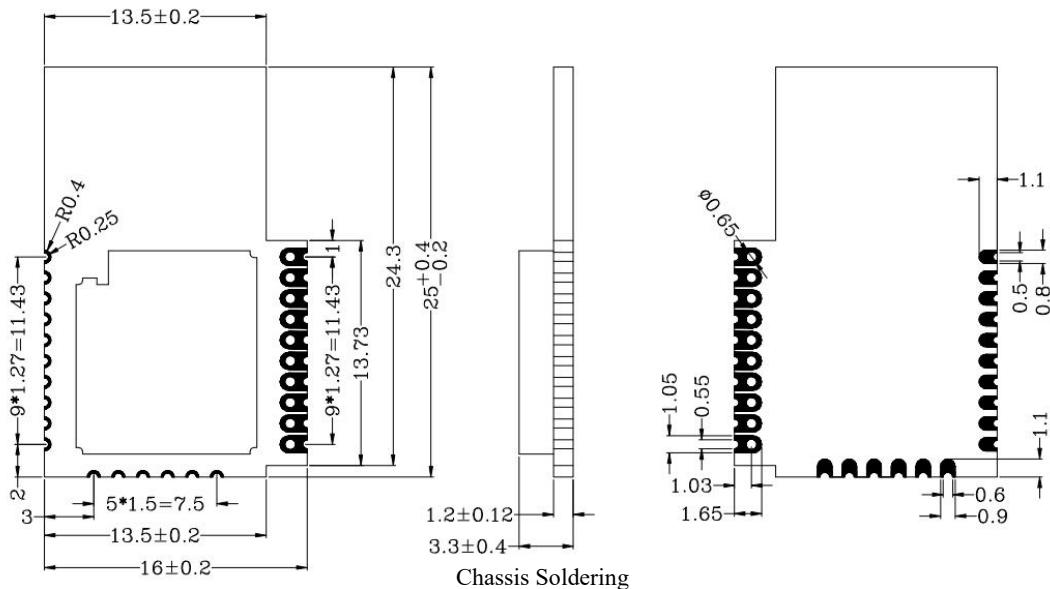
Dimensional Drawing of XJ-B1A Module Series
